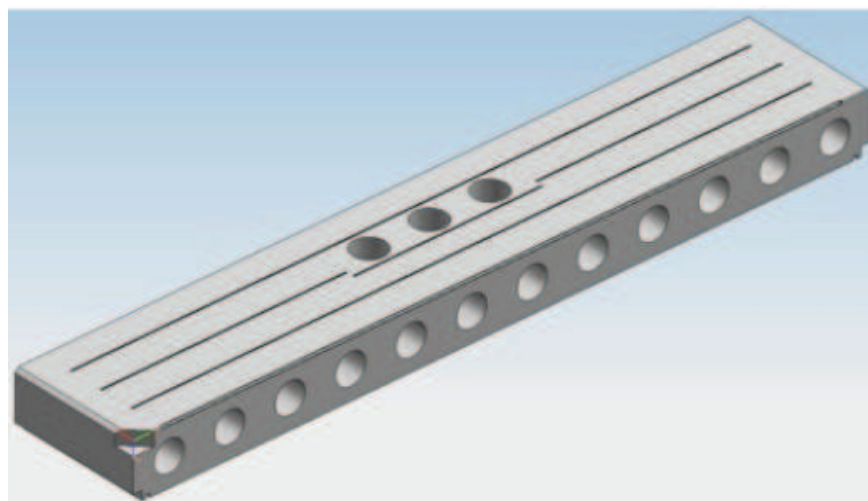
View of a joining flange where the grooves for the brazing filler metal are shown.
